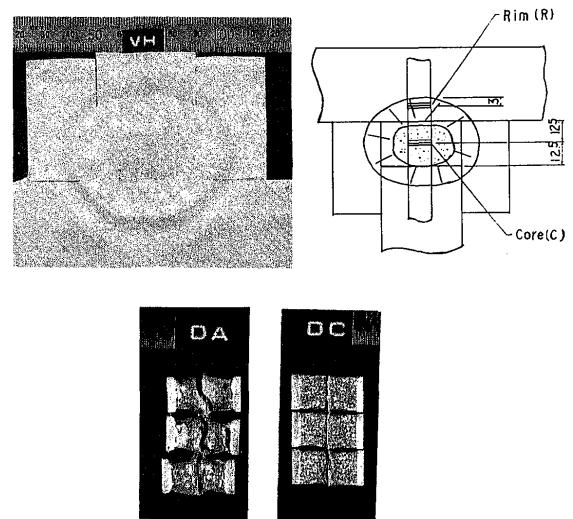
Example of macro section and fracture of impact test piece in ES weld joint
